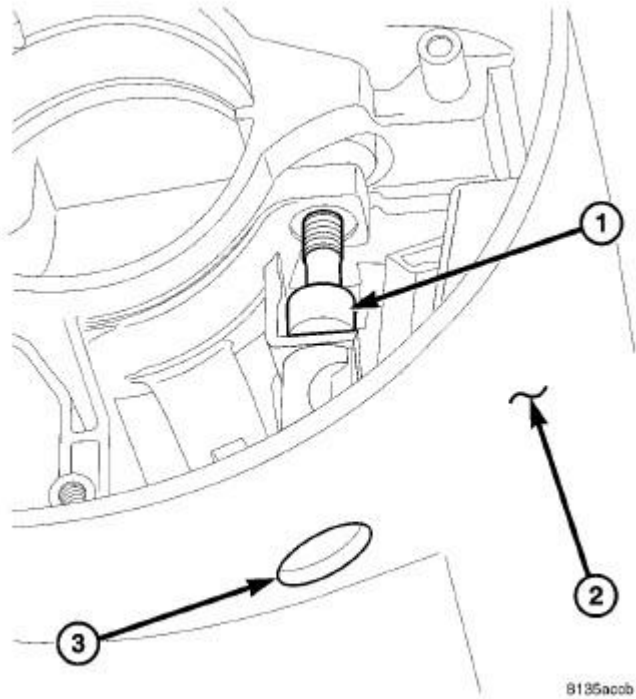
STEERING COLUMN CONTROL MODULE SCREW
